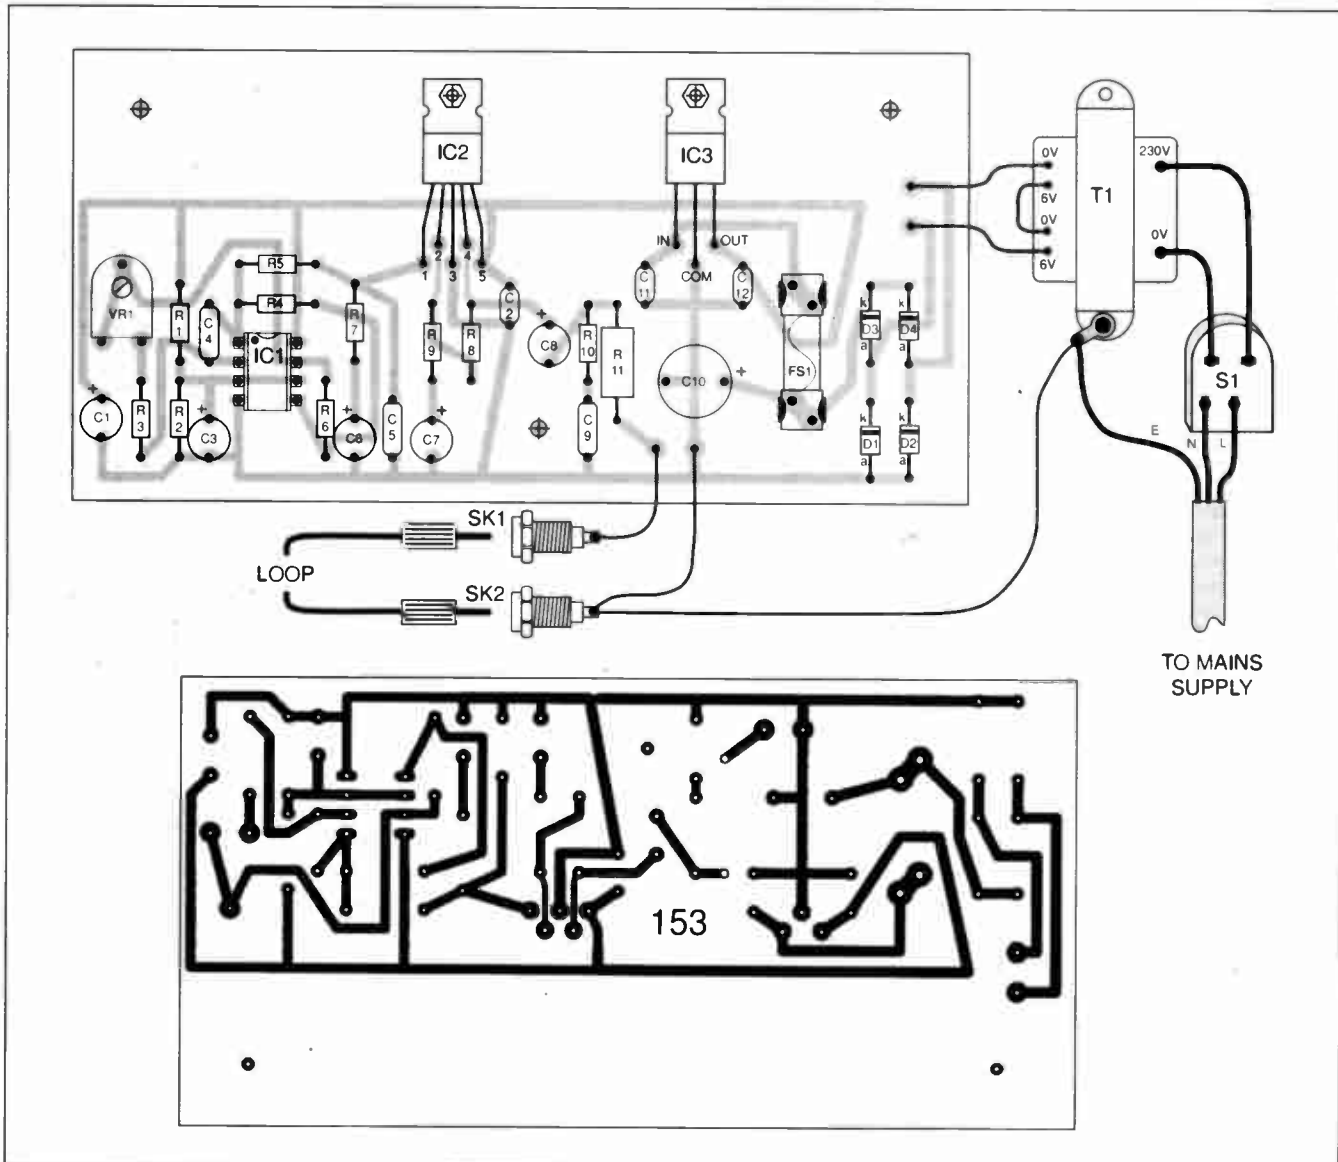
Transmitter printed circuit board component layout, including mains power supply, and full size underside copper foil master.
